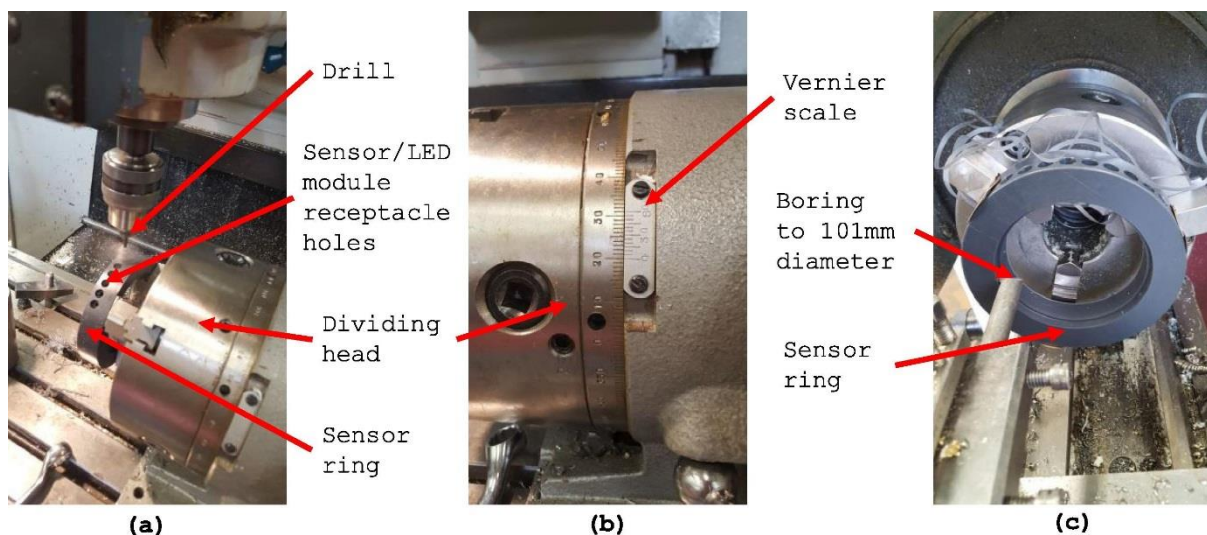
a) Drilling of sensor/LED module receptacle holes in the sensor ring, shown mounted in a dividing head to produce a regular separation angle of 10°. Centre drilled through at 4mm diameter (inner collimator hole), and then counter bored at 8.7mm diameter to 8mm depth (module receptacle hole). b) The Vernier scale on the dividing head showing the setting required to
